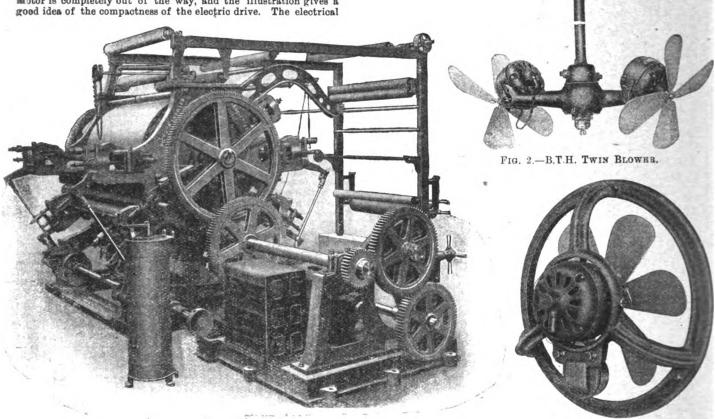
SIX COLOUR CLOTH PRINTING MACHINE DRIVEN BY A WITTON MOTOR.
